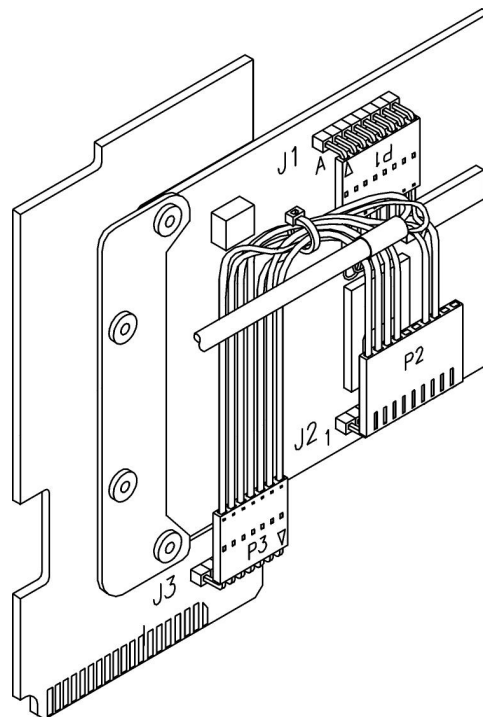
SureTemp Board & Mounting Support Assembly (675 OEM)
